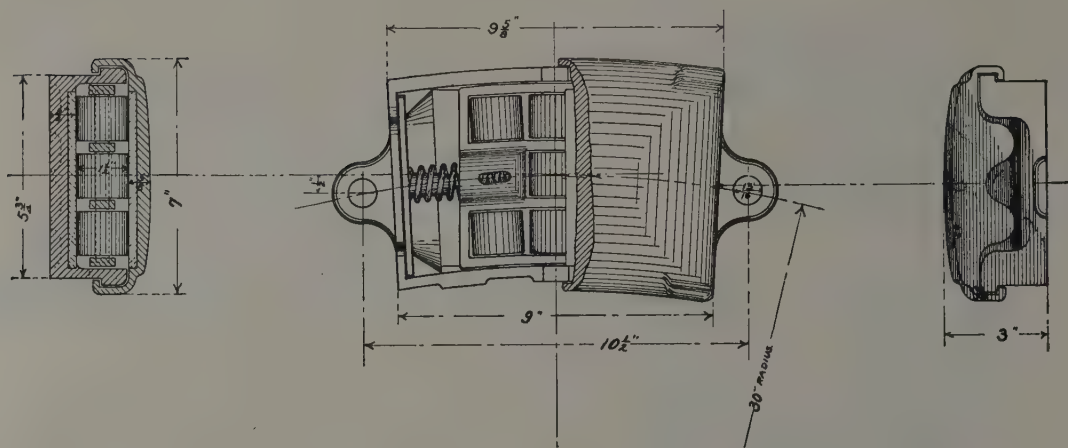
Perry Freight Side Bearing No. 8-s.
